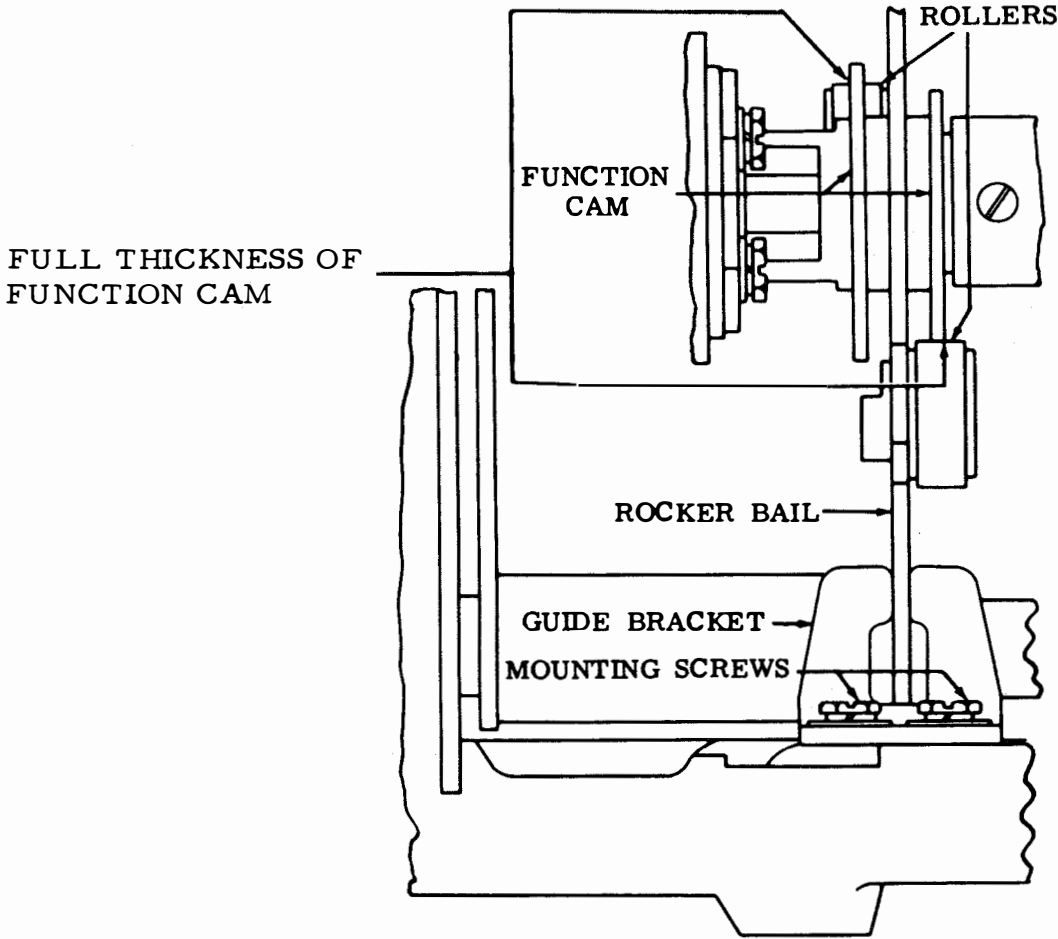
Cam Follower Roller Alignment - Right Side View
